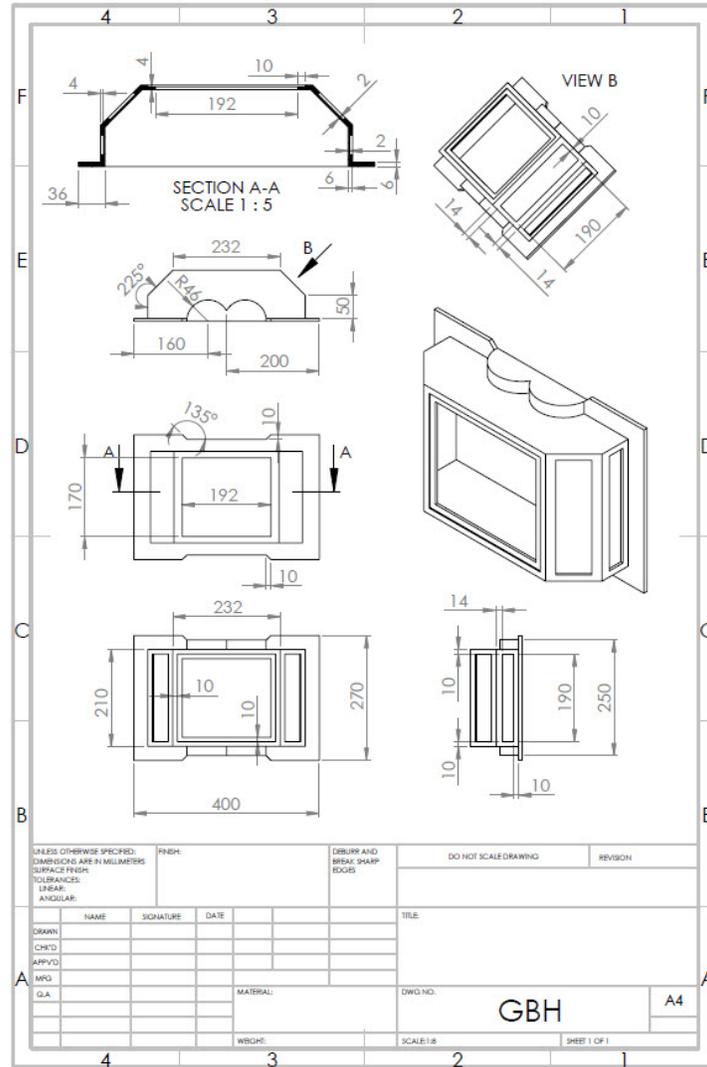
Figure Appendix B.9: Technical drawing of the manufactured aluminium housing.
